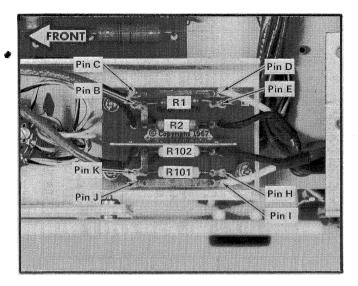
Right side interior view with lower right cabinet frame section removed to show Attenuator board pin connections.
